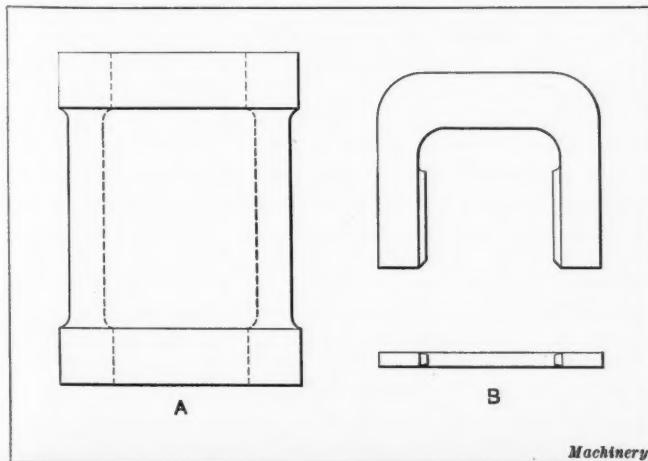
(A) Gage for testing Concentricity and Diameter of Fuse Body Platform or Flange. (B) Right-angle Gage for testing Position of Flange Relative to Central Stem of Fuse Body
